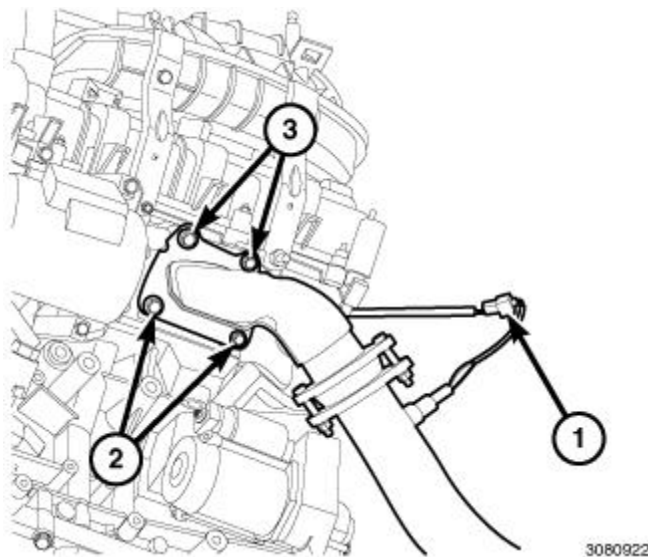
Left Upstream Oxygen Sensor Electrical Connector & Down Pipe Flange Bolts
